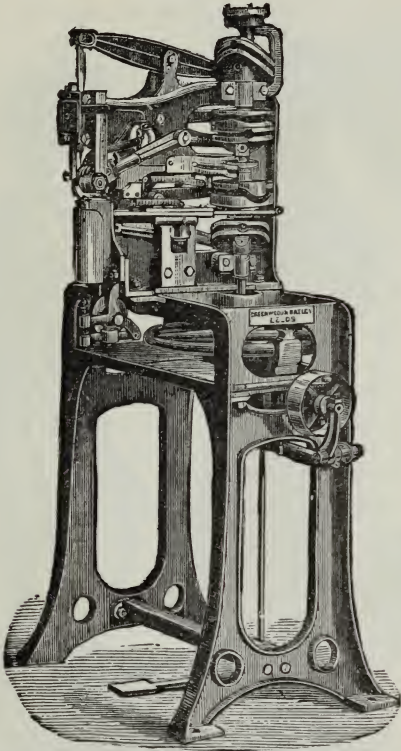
KEATS' FAIR-STITCHING MACHINE.
